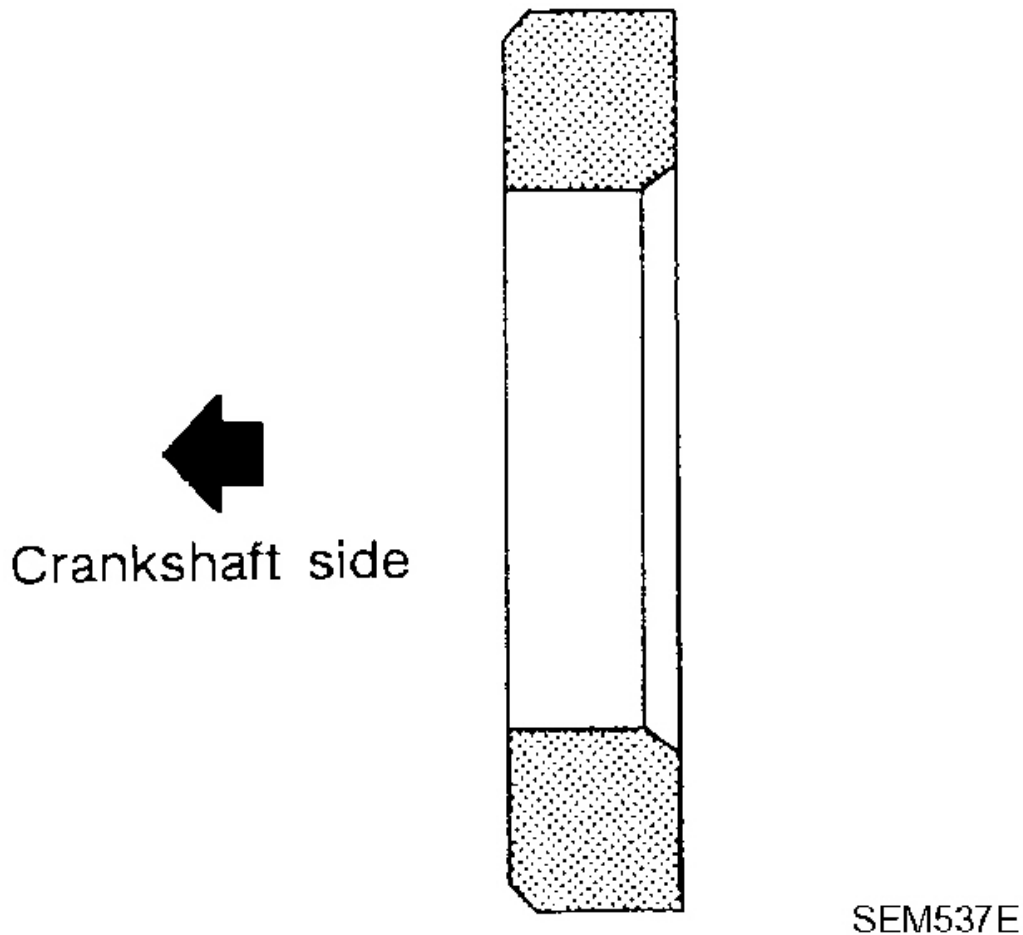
Identifying Pilot Converter Without Hoisting Engine With Engine Stand
